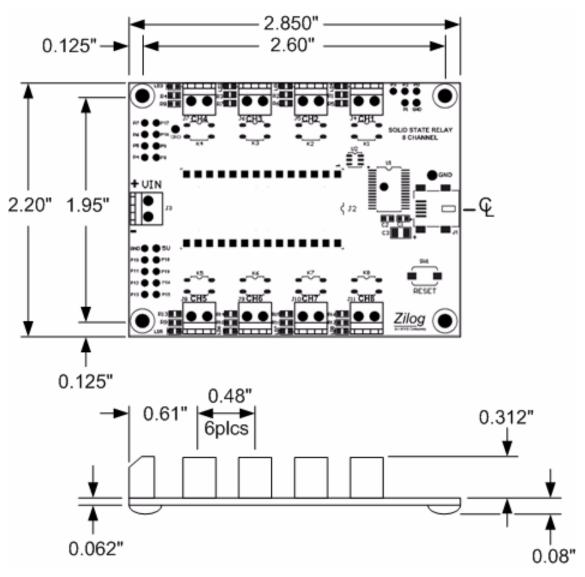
Mini-Z Solid State Relay Design Board Dimensions
